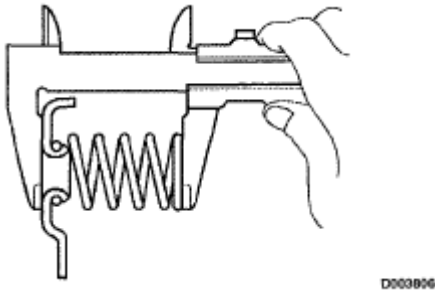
Measuring Free Length Of Spring Together With Spring Seat Using Vernier Calipers
